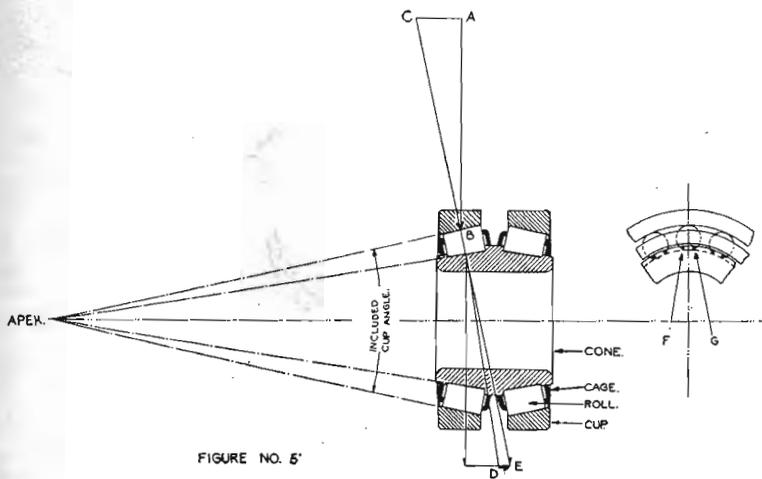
Showing Theory and Design of Tapered Roller Bearings
